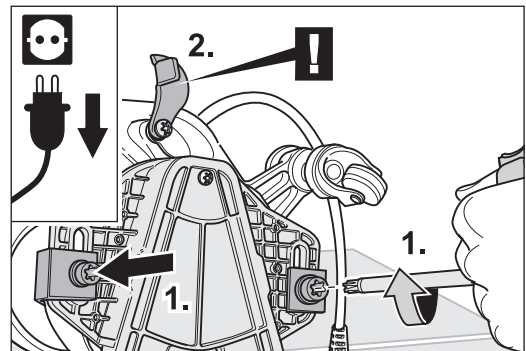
Turn both screws for connecting the attachment and place a washer and a guide angle in the respective thread of the fan housing (1.). Make sure that the belt tightening plate is not located between the attachment and the fan housing (2.)!
